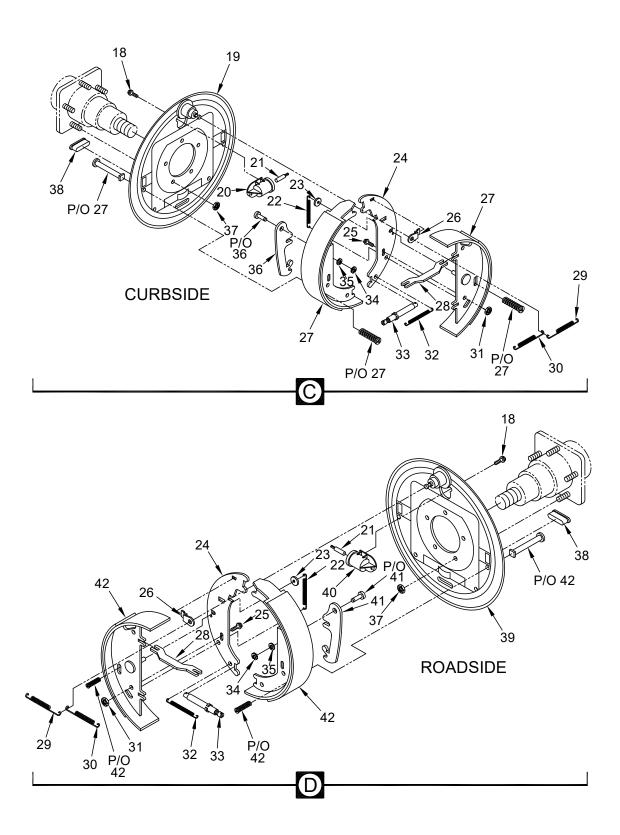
Chassis - Brake Installation, TG421-9006G, TG421-9006T (Sheet 4 of 5).
